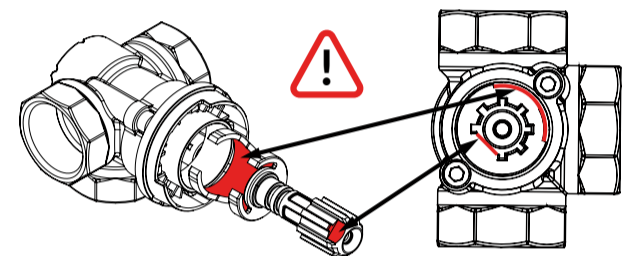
Position of the closing element respect to the flattening on the adapter and valve spindle
